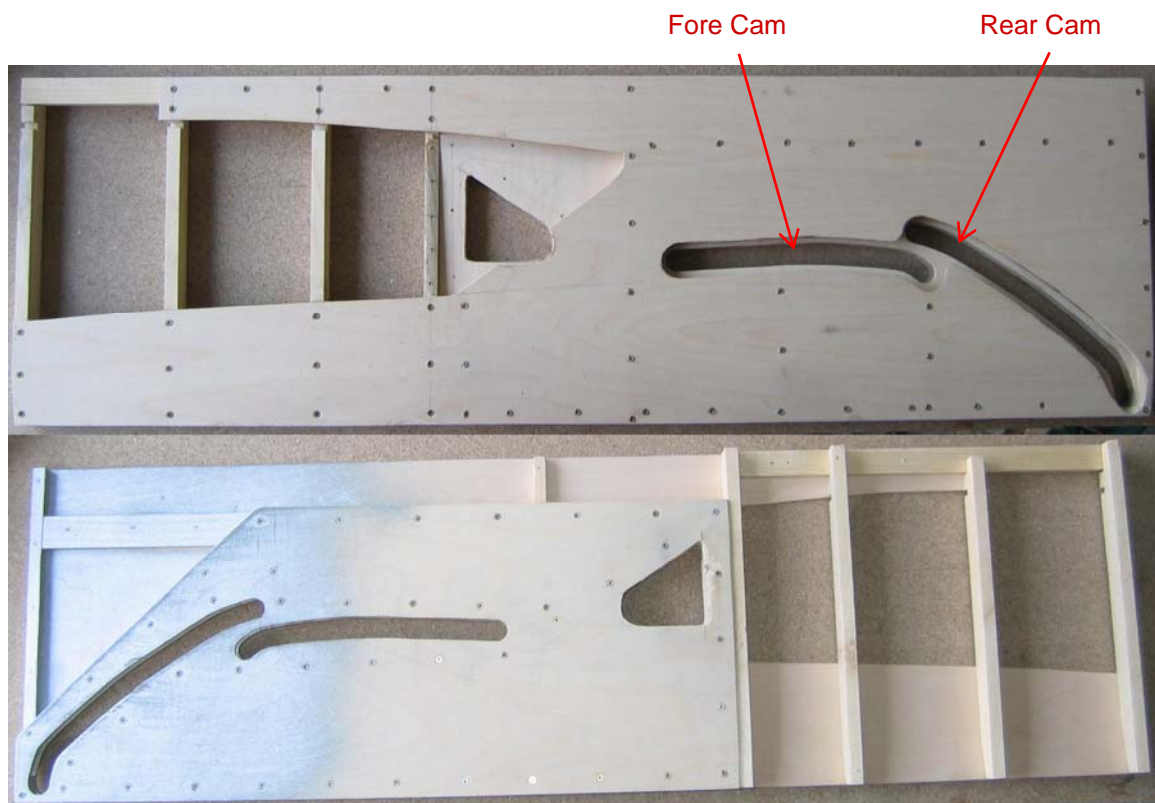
Fuselage section with inboard flap track cams (outboard/ inboard view)
